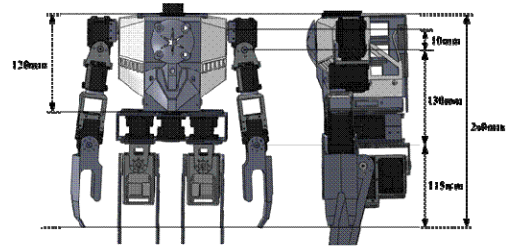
Arms mechanism dimension of HIWIN MAN.
